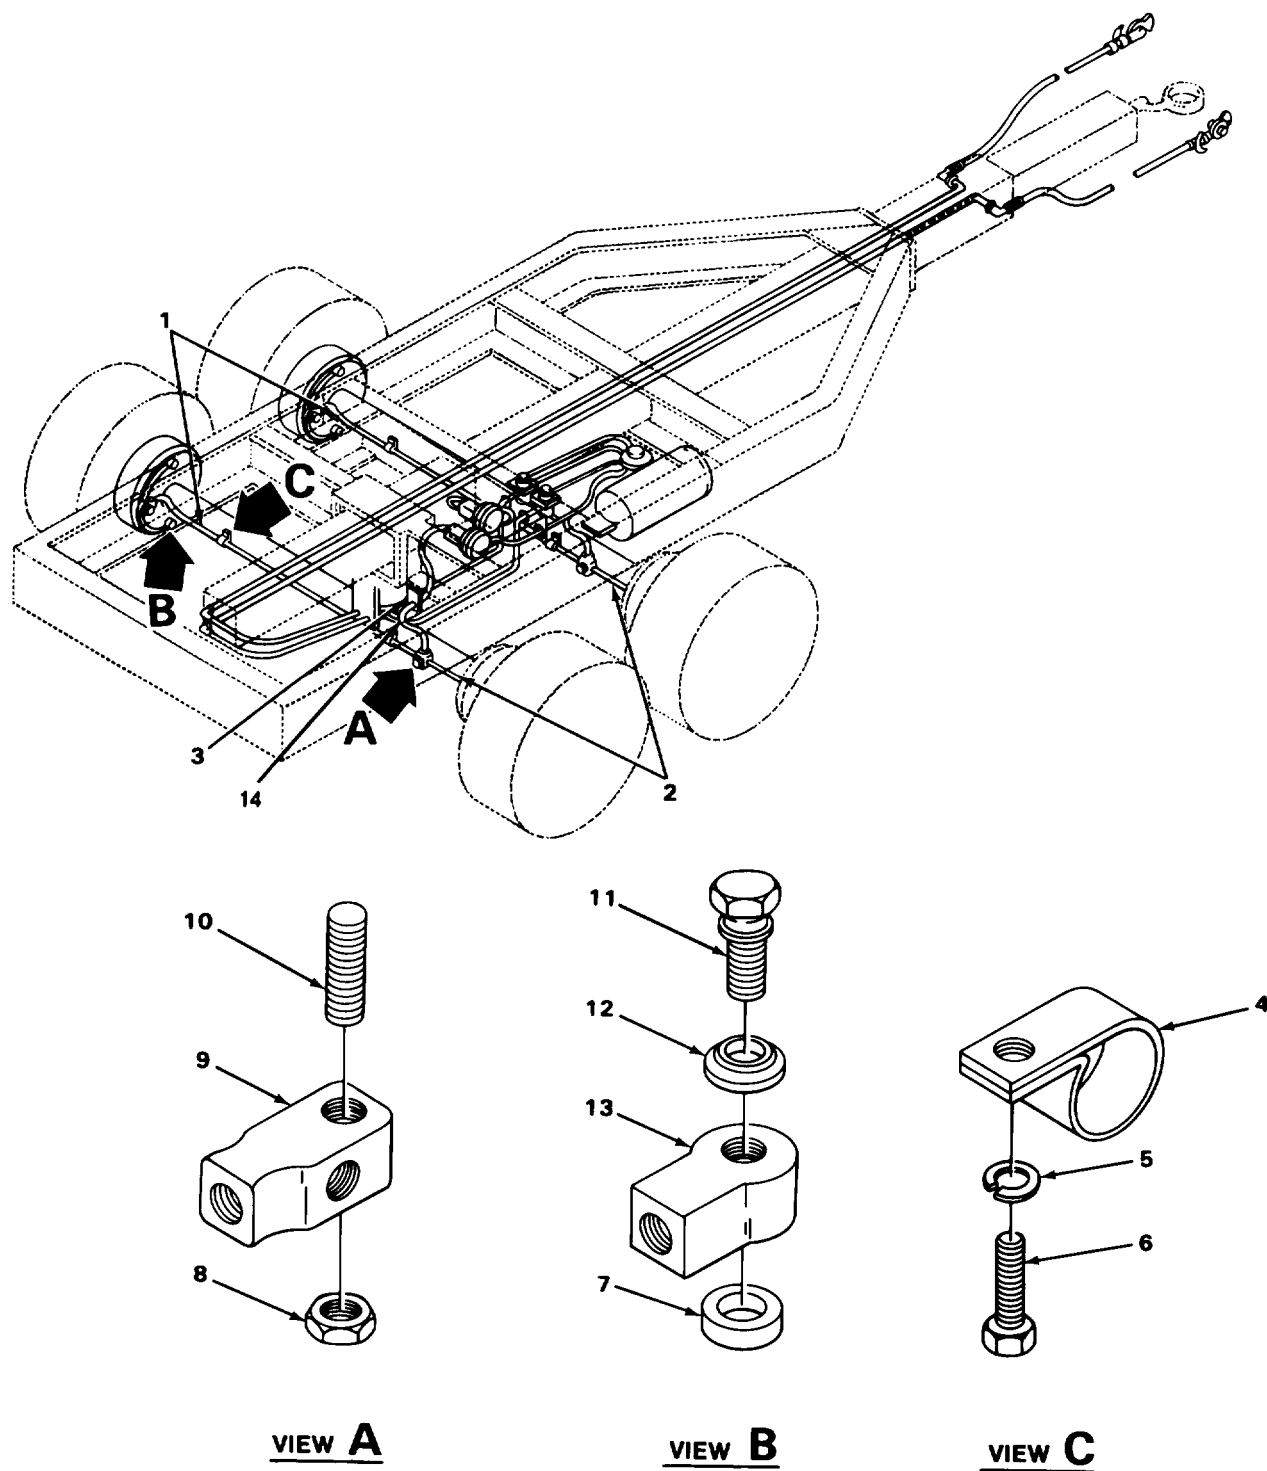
HYDRAULIC MASTER CYLINDER ASSEMBLY AND WHEEL CYLINDER ASSEMBLY.
